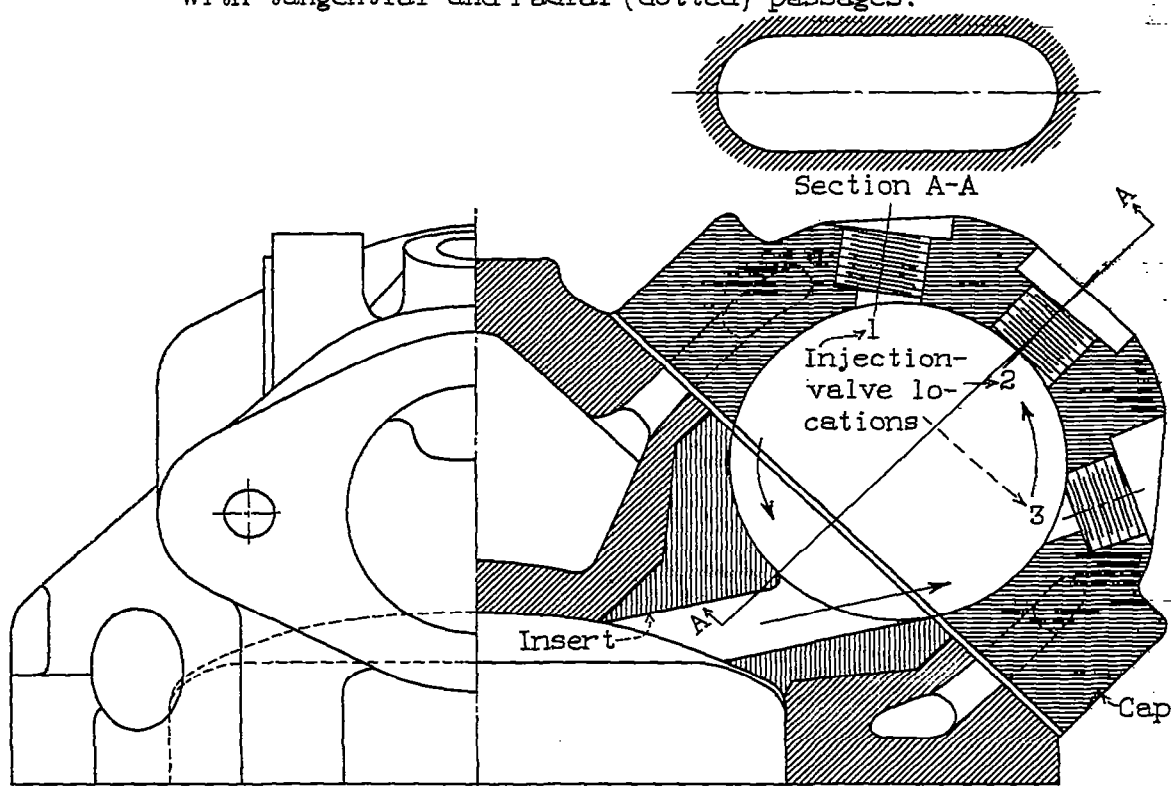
N.A.C.A. cylinder-head design 7 showing disk-shaped prechamber.
